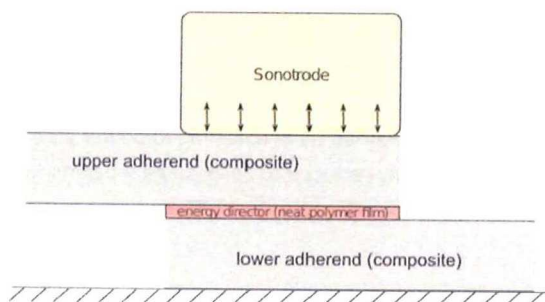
Schematic drawing of the ultrasonic welding process using a flat energy director (Levy et al., 2014).
